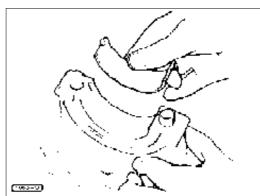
Fitting the one main bearing shell into the main bearing cap.
